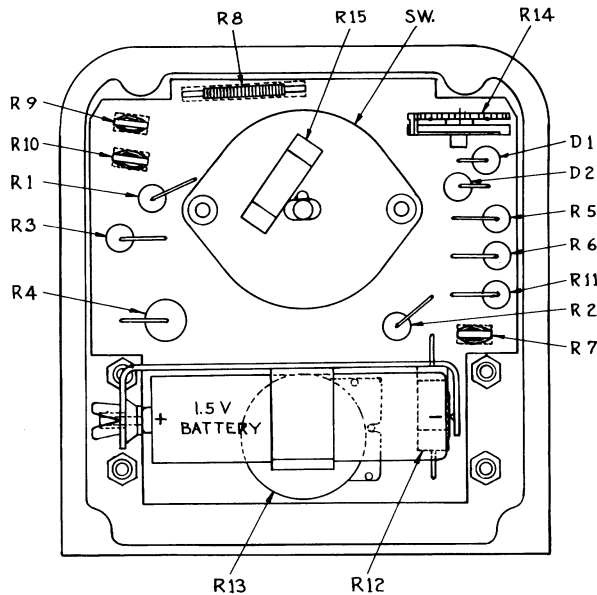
LOCATION OF PARTS ON PRINTED CIRCUIT BOARD.
